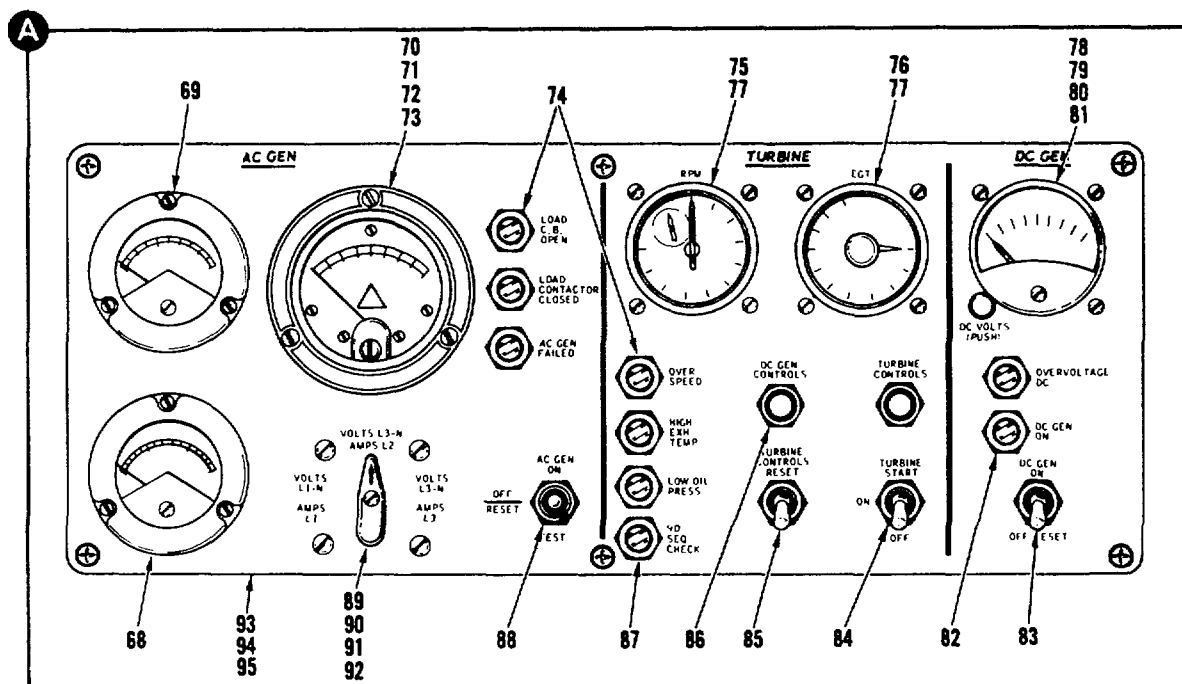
Dual Purpose Mobile Check and Adjustment/Generator Stand (Sheet 3 of 3)
